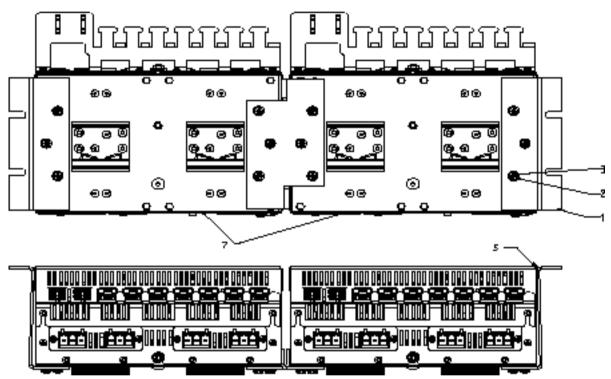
Rack mounting of two IE-Switches X-300EEC fastened togetherFigure at top: Rear of the switchesFigure at bottom: View from below
